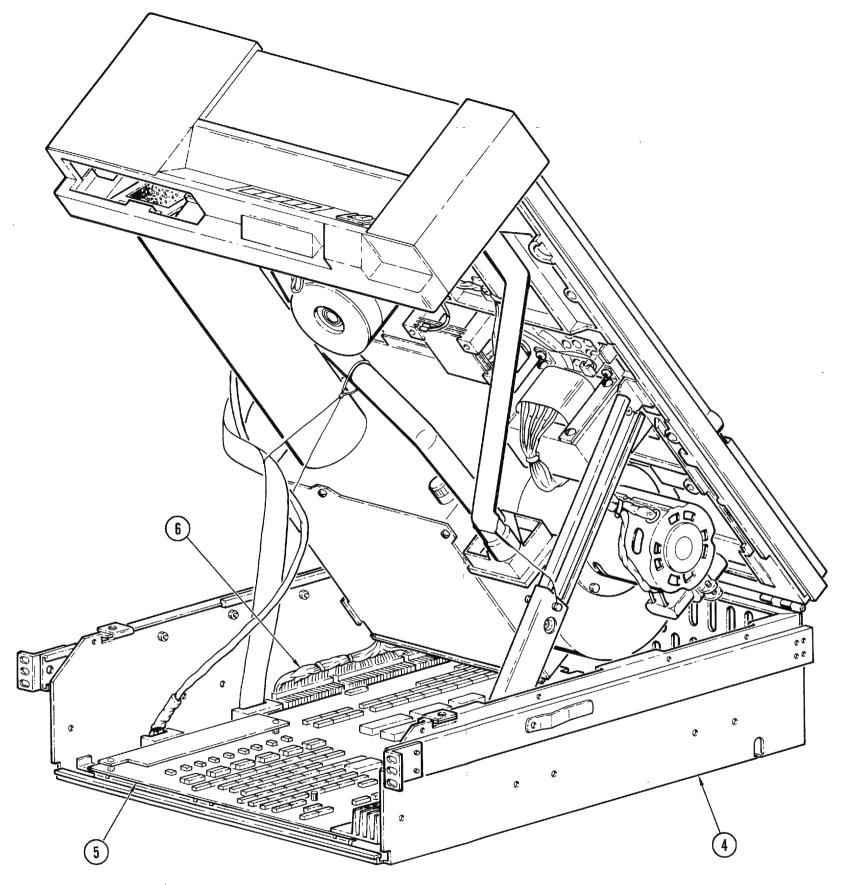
Model F880 Magnetic Tape Streamer Unit (Assembled View)
